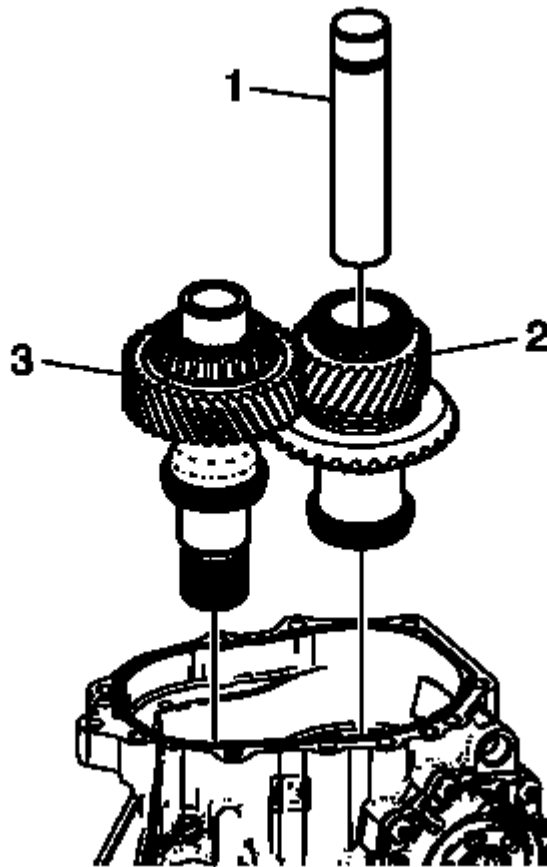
Identifying Idler Gear Shaft, Input Shaft & Idler Gear
